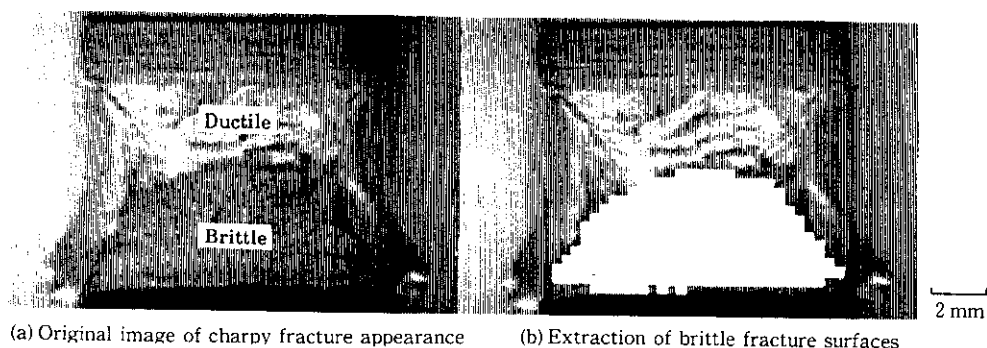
Measurement of charpy fracture appearance using texture analysis technique
